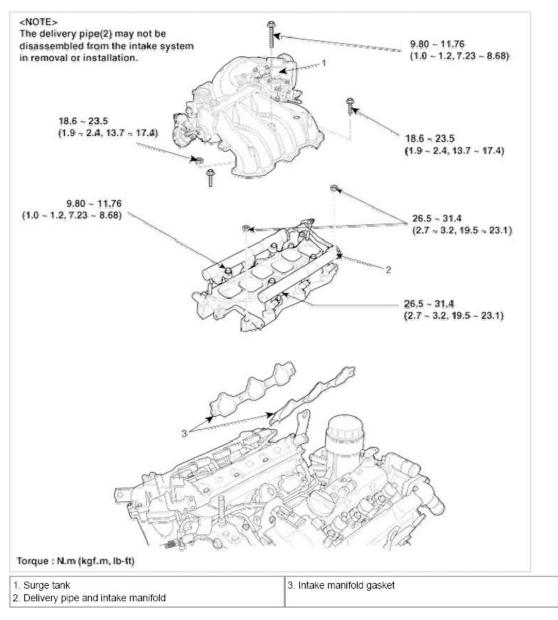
Identifying Intake & Exhaust System Components With Torque Specifications Courtesy of HYUNDAI MOTOR CO.
